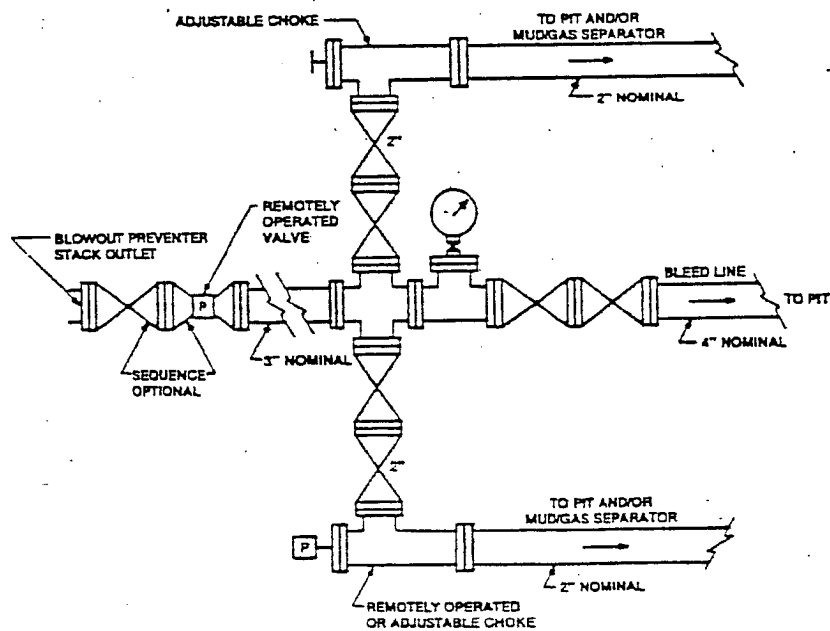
Typical choke manifold assembly for 5M rated working pressure service — surface installation.
